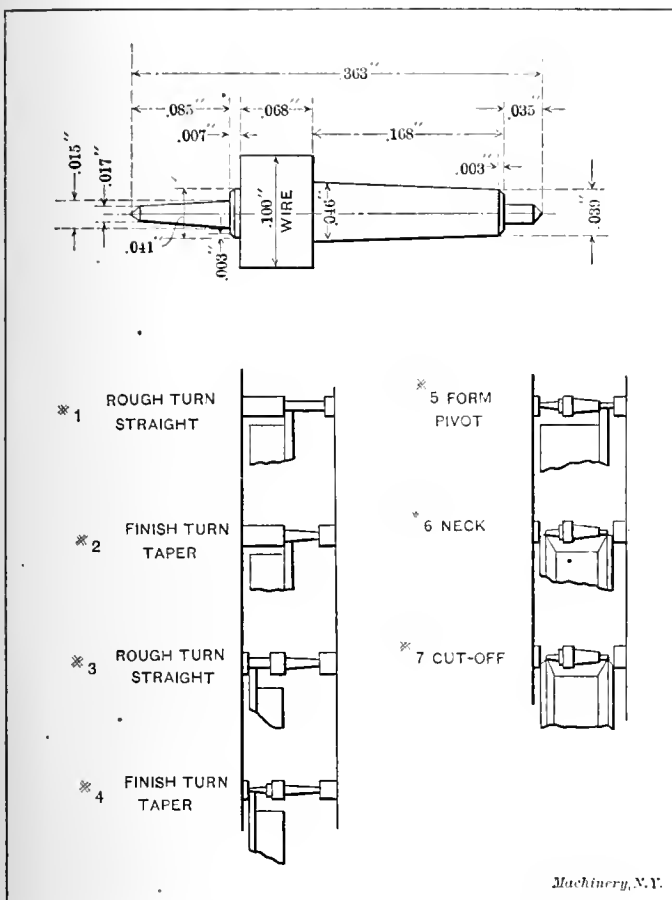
Typical Order of Operations for Machine shown in Fig. 5.
